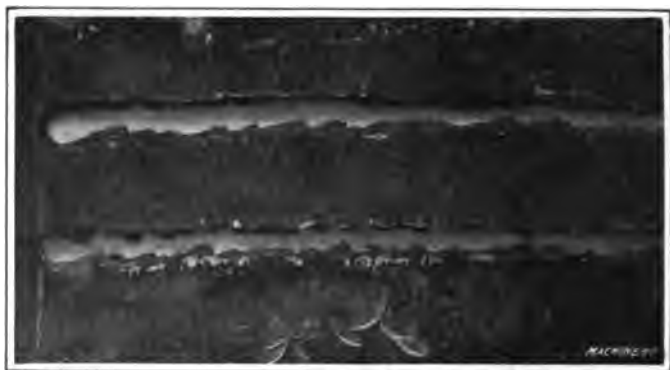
Welding Bronze Sleeve of Steamship Tailshaft
